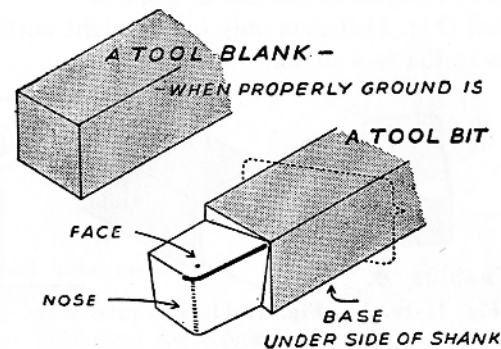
Tool blank and ground tool. (The Shell Oil Company)
